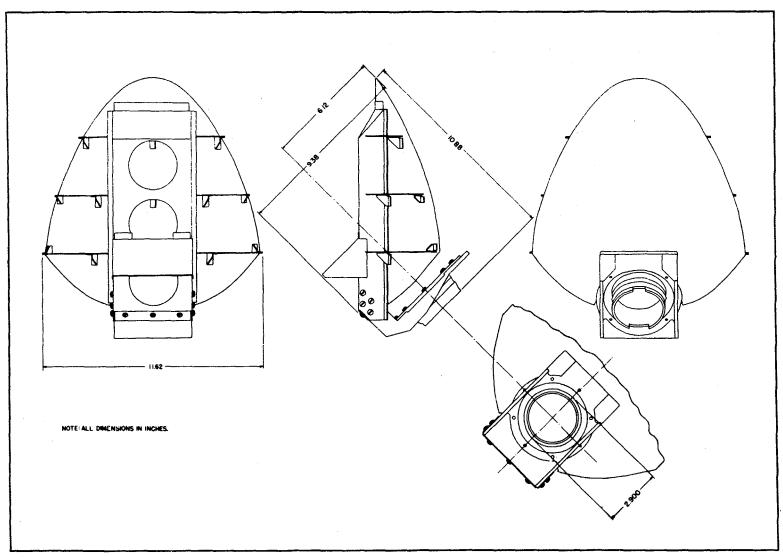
Antenna Reflector AT-182/APA-69, Outline and Mounting Dimensions
